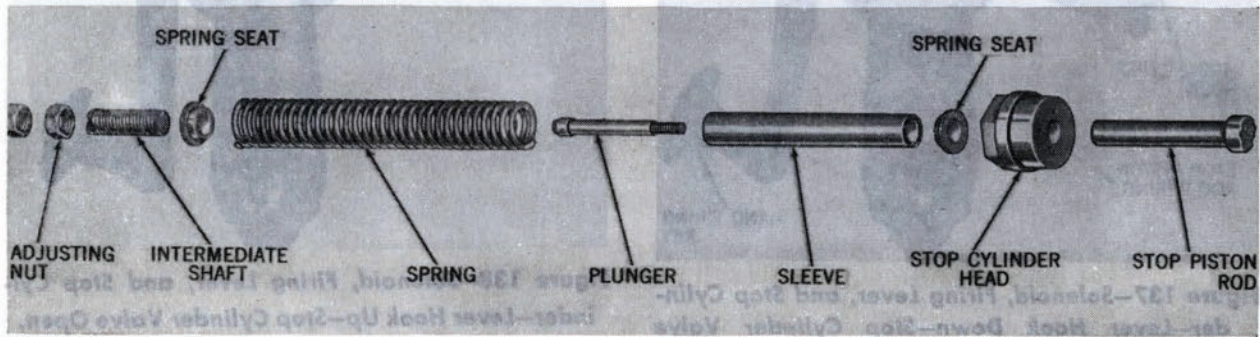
Muzzle End of Torpedo Stop Cylinder Disassembled.
